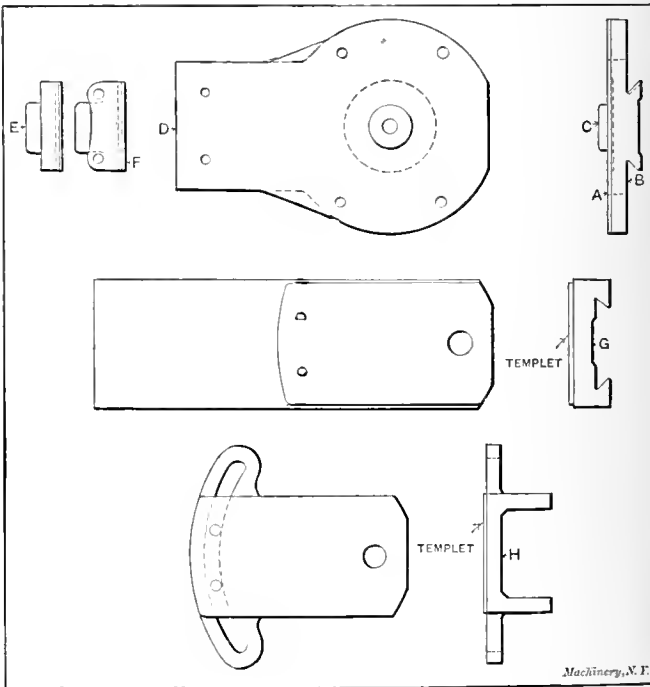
Sheet Iron Templets for Laying out Planer Crossrail Members
